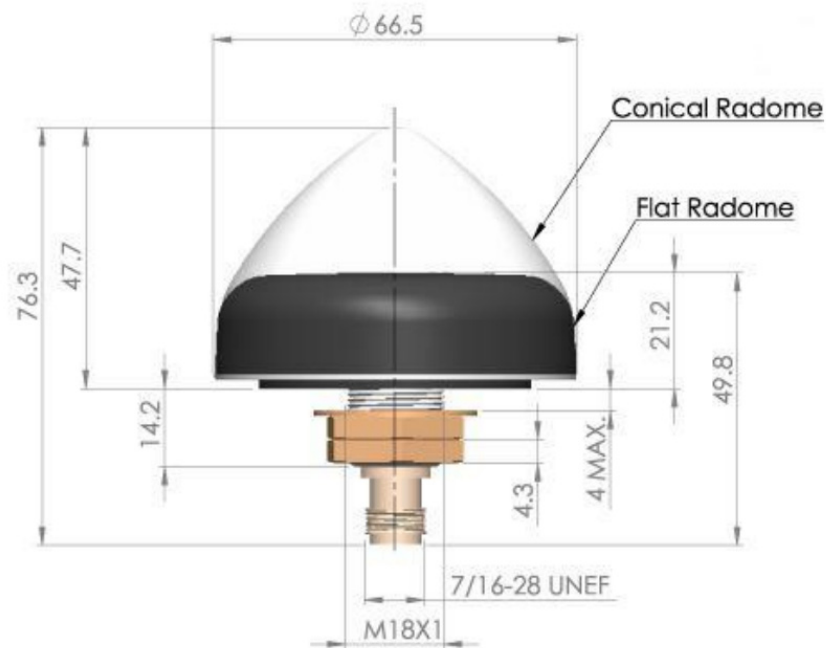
Stainless steel Antenna mounting apparatus dimensions
